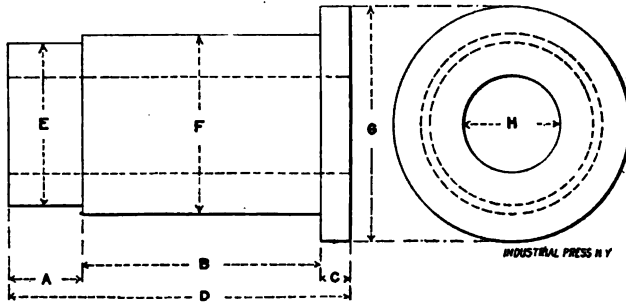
Sample Drawing, Showing Location of Dimension Lines.
